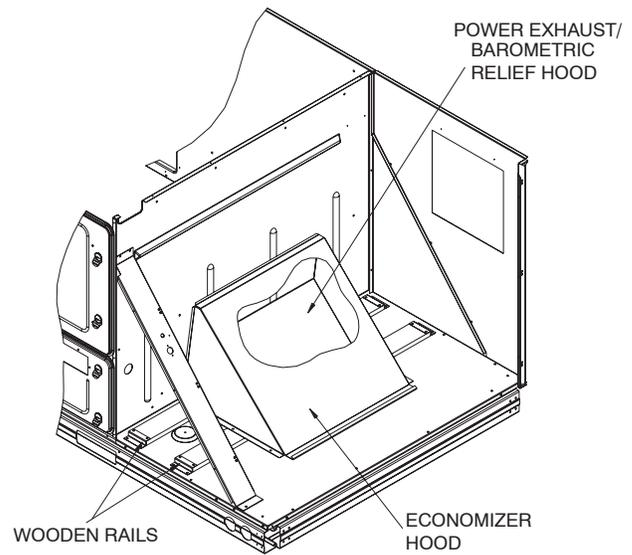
Economizer and Barometric Relief/Power Exhaust Hoods Shipping Positions (48PG08-14)
